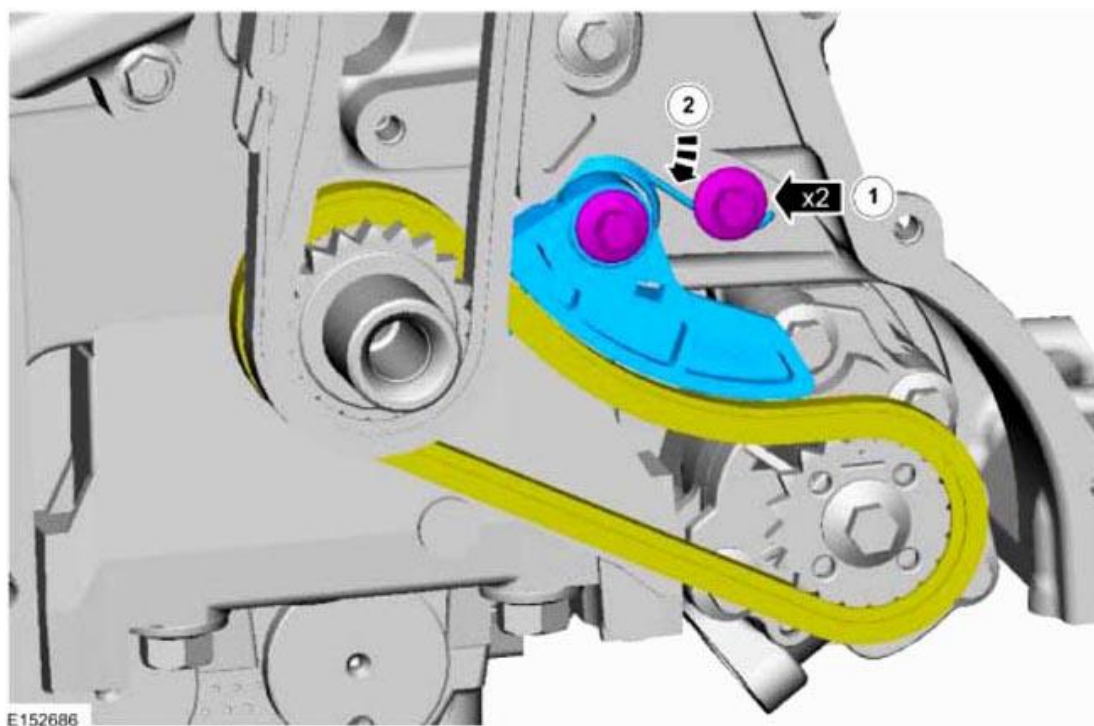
Pushing Tensioner Spring Down And Position Spring Under Shoulder Bolt
